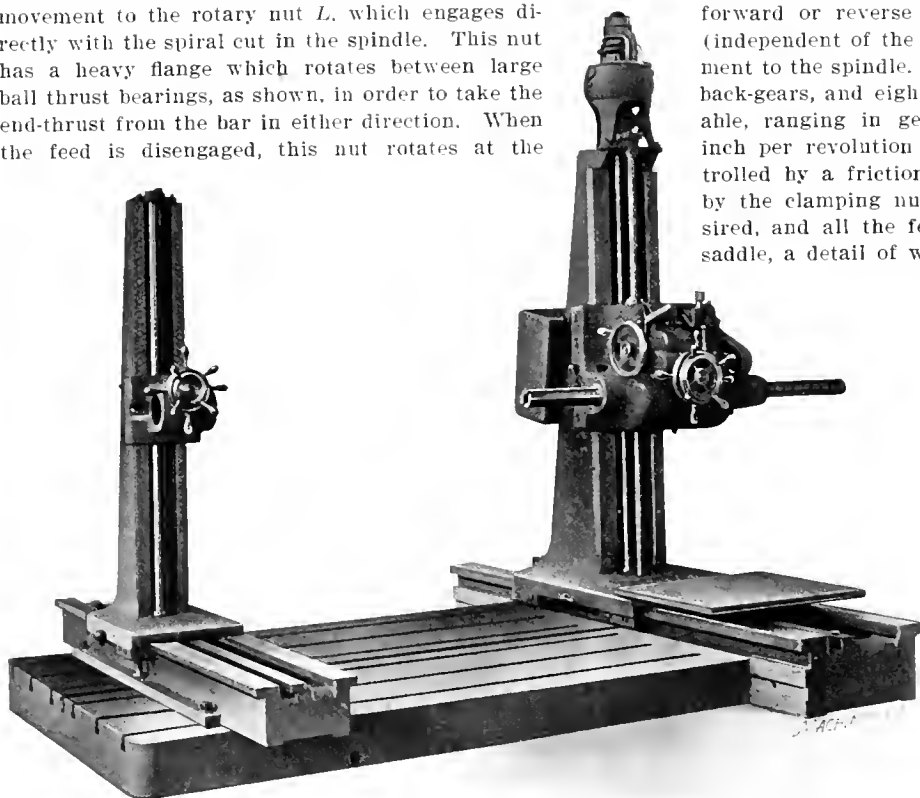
Rochester Horizontal Boring, Drilling, Tapping and Milling Machine
